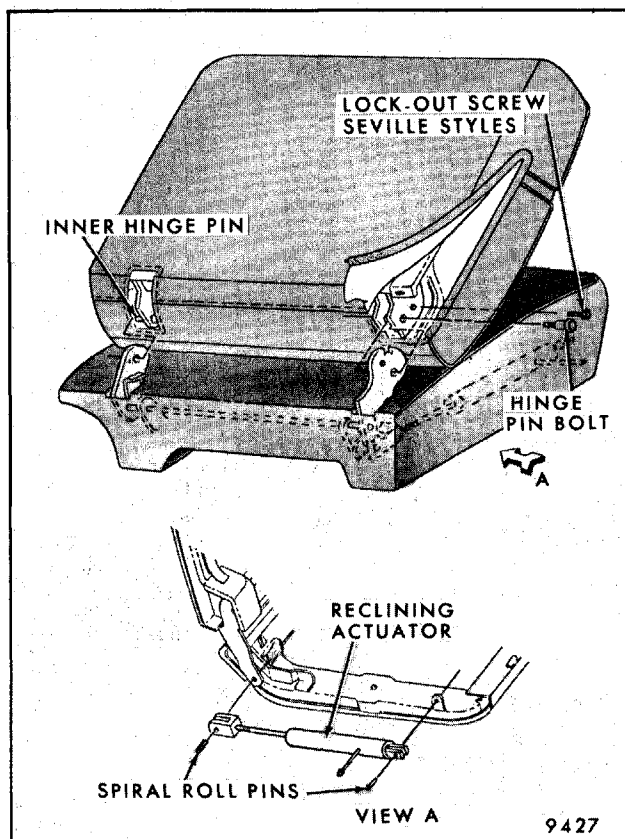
Front Seat Reclining Back Assembly - Chevrolet Monte Carlo and Cadillac Seville 50-50 Seat with Manually Operated Reclining Seat Back
